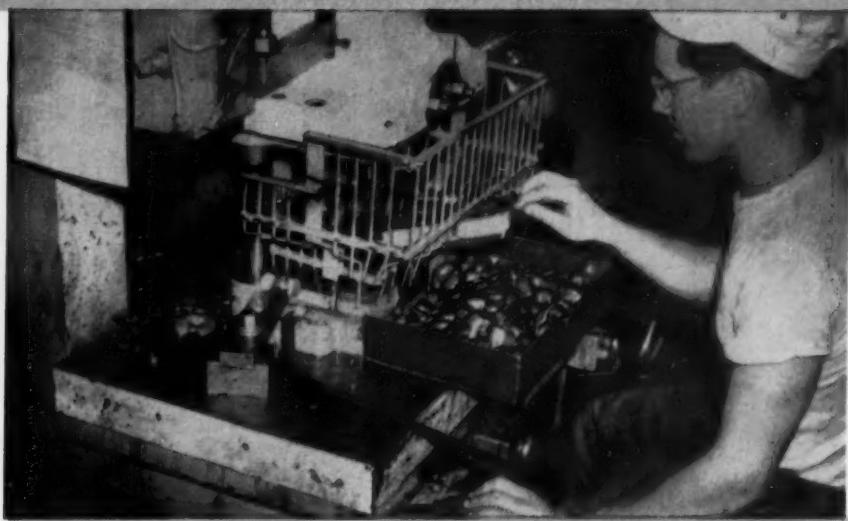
This is an example of an inclined chute feed with air ejection permitting complete guard enclosure of die and allowing one button control, leaving one hand free
